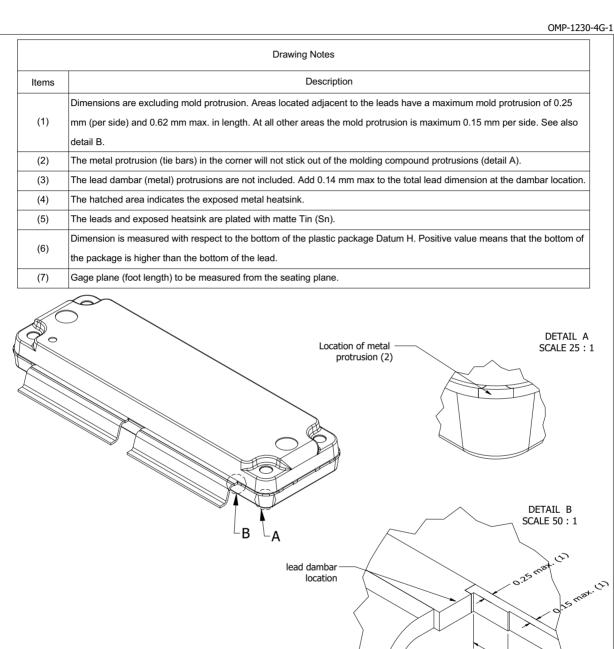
Package outline OMP-1230-4G-1 (sheet 1 of 2)
